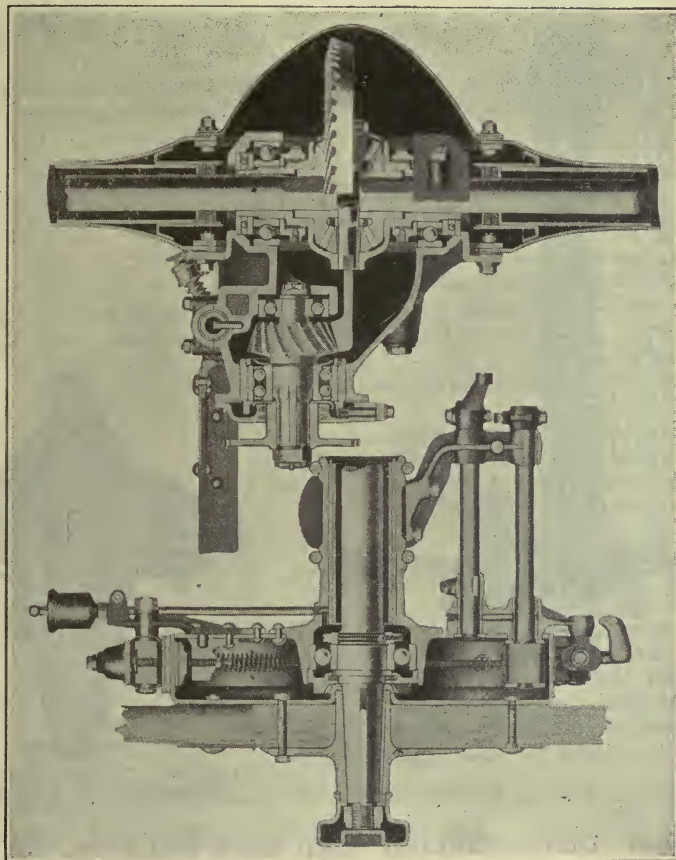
Packard Rear Axle. Note method of adjusting pinion gear and bevel gear.
